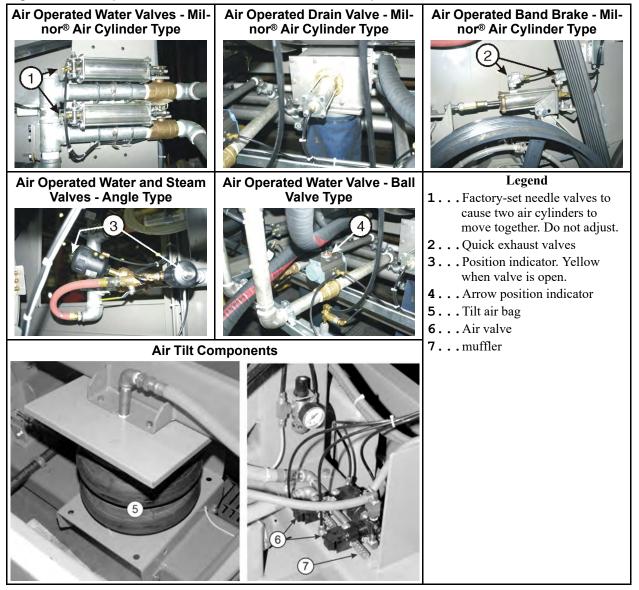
Compressed Air Mechanisms These are examples. Your machine can look different.
